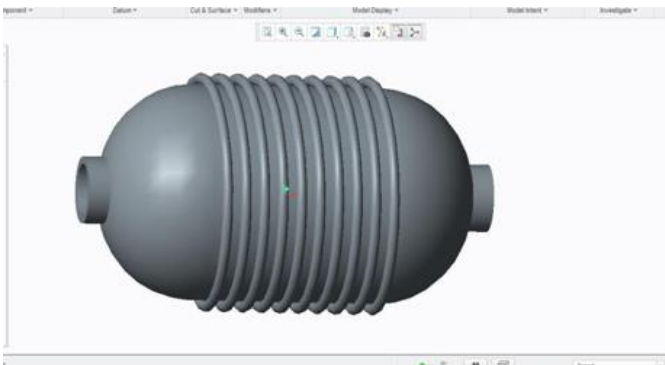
3 Dimensional view of wounded pressure vessel
